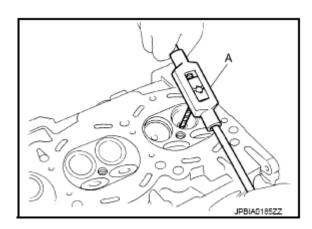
Reaming Cylinder Head Valve Guide (EXH) Hole Using Valve Guide Reamer Courtesy of NISSAN NORTH AMERICA, INC.
